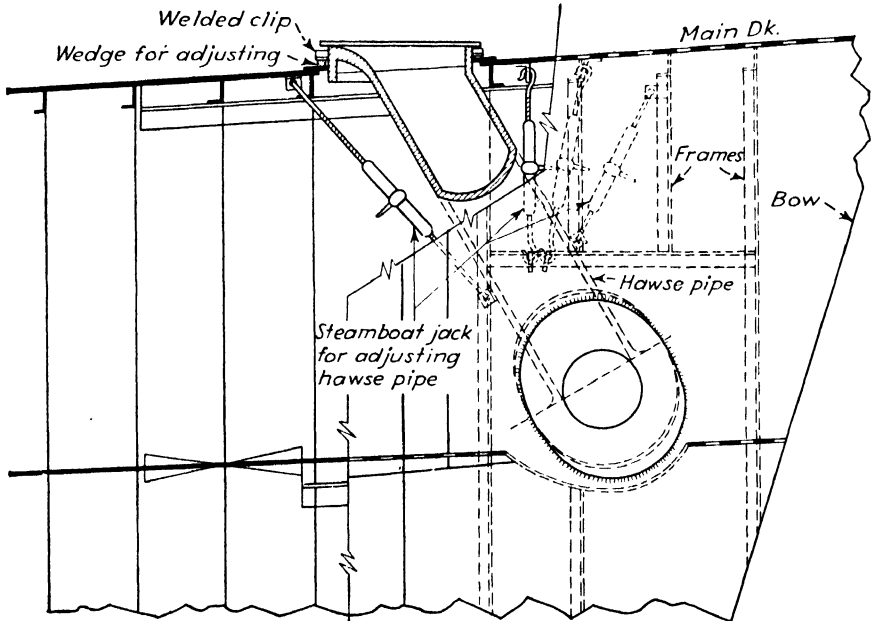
Four steamboat jacks being used to set hawsepipe casting in any direction desired.
